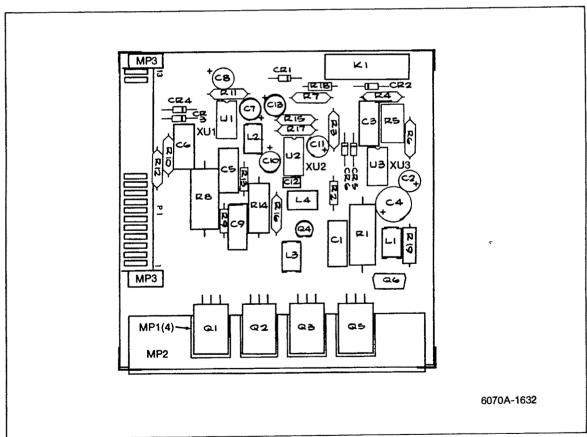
A6A4 +12V, -12V, +24V Series Pass PCB Assembly
